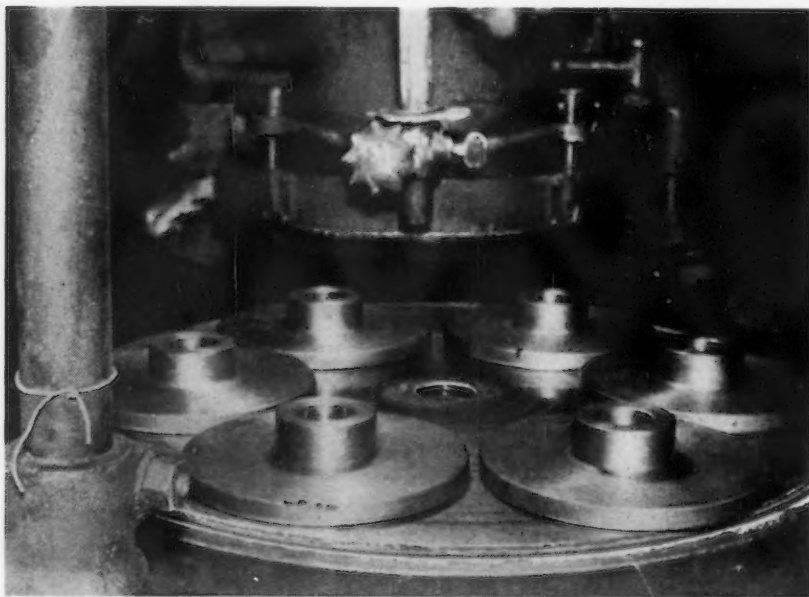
Gear blanks are surface ground on this machine, six blanks 5½ in. in diameter being finished at one setting. The magnetic chuck is 25-in. diameter. o o o
